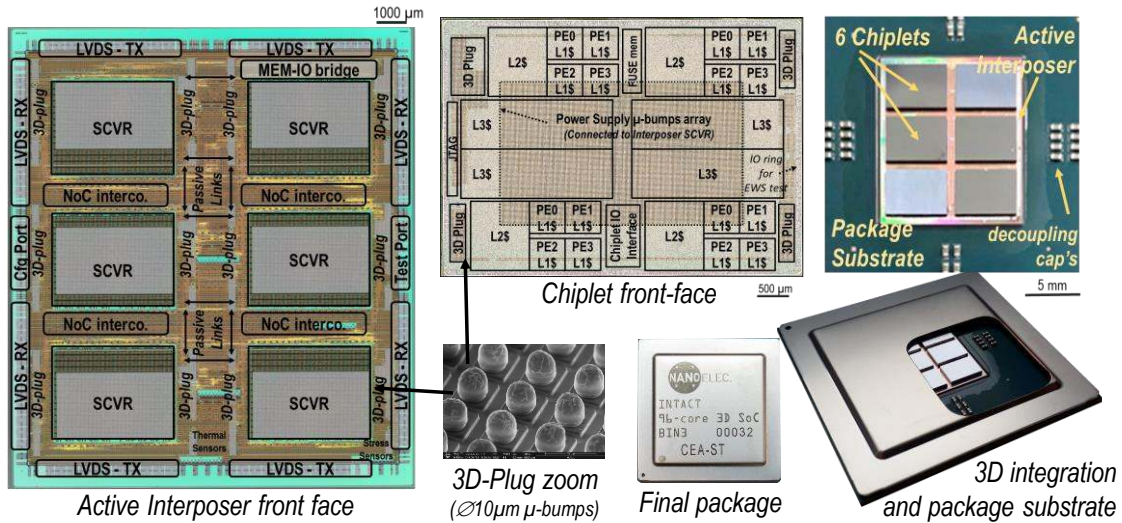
Chiplet and Active Interposer floorplans, details of the 3D-plug μ -bumps, final 3D integration and package
